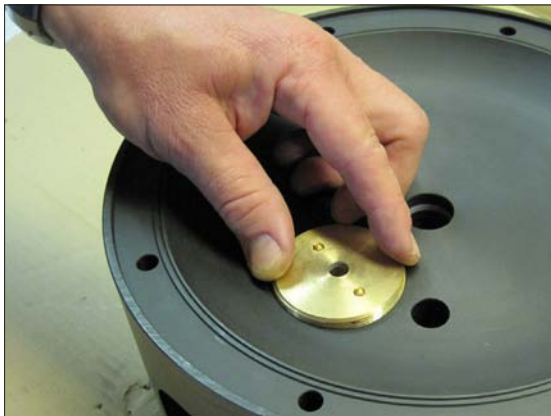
Carefully screw the endcap by hand into the centerblock. Sometimes you have to first screw counter clockwise until the threads match.
